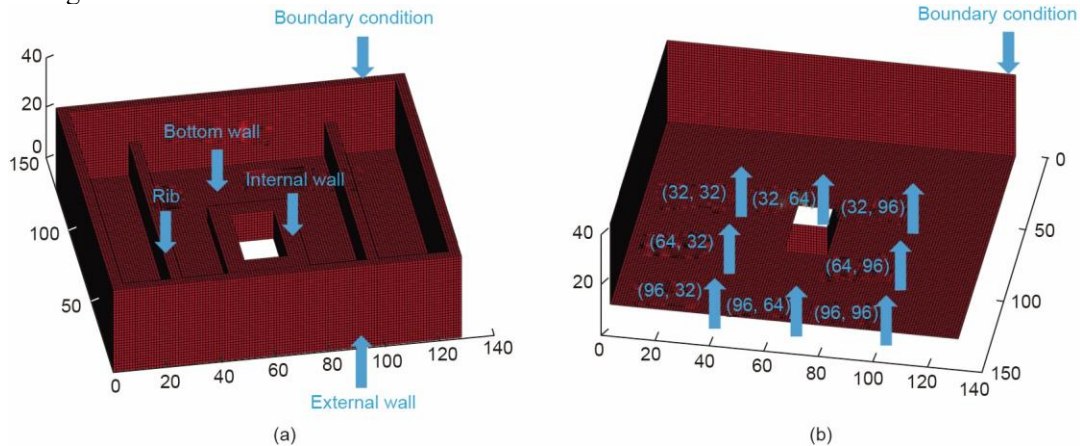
3D housing part example problem: (a) the composition of 3D housing parts, and (b) boundary and load conditions of 3D housing parts.
